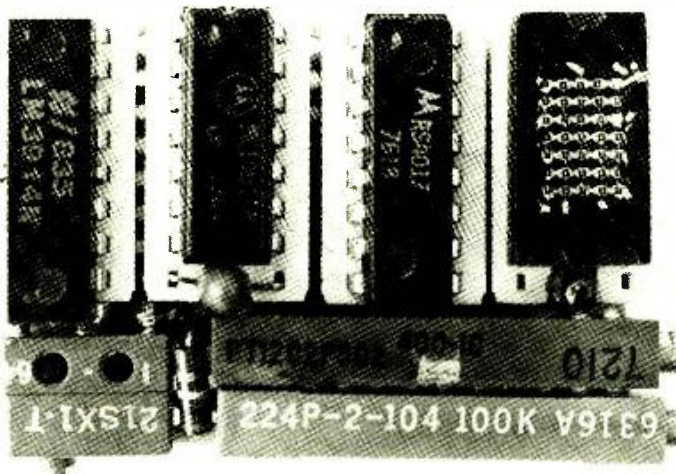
Photograph of the wrapped-wire prototype LED oscilloscope assembled on a small piece of perforated board about 1.2" × 1.2".
